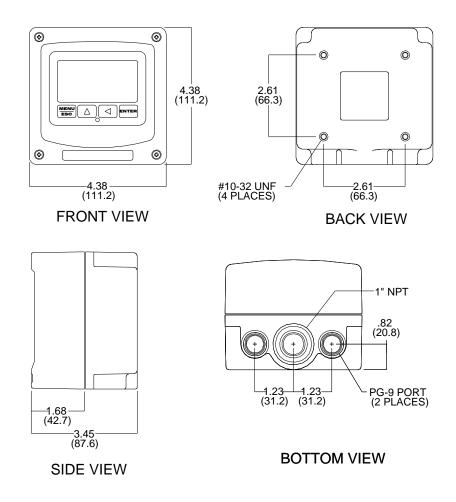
Q45 Enclosure Dimensions, 2-Wire
